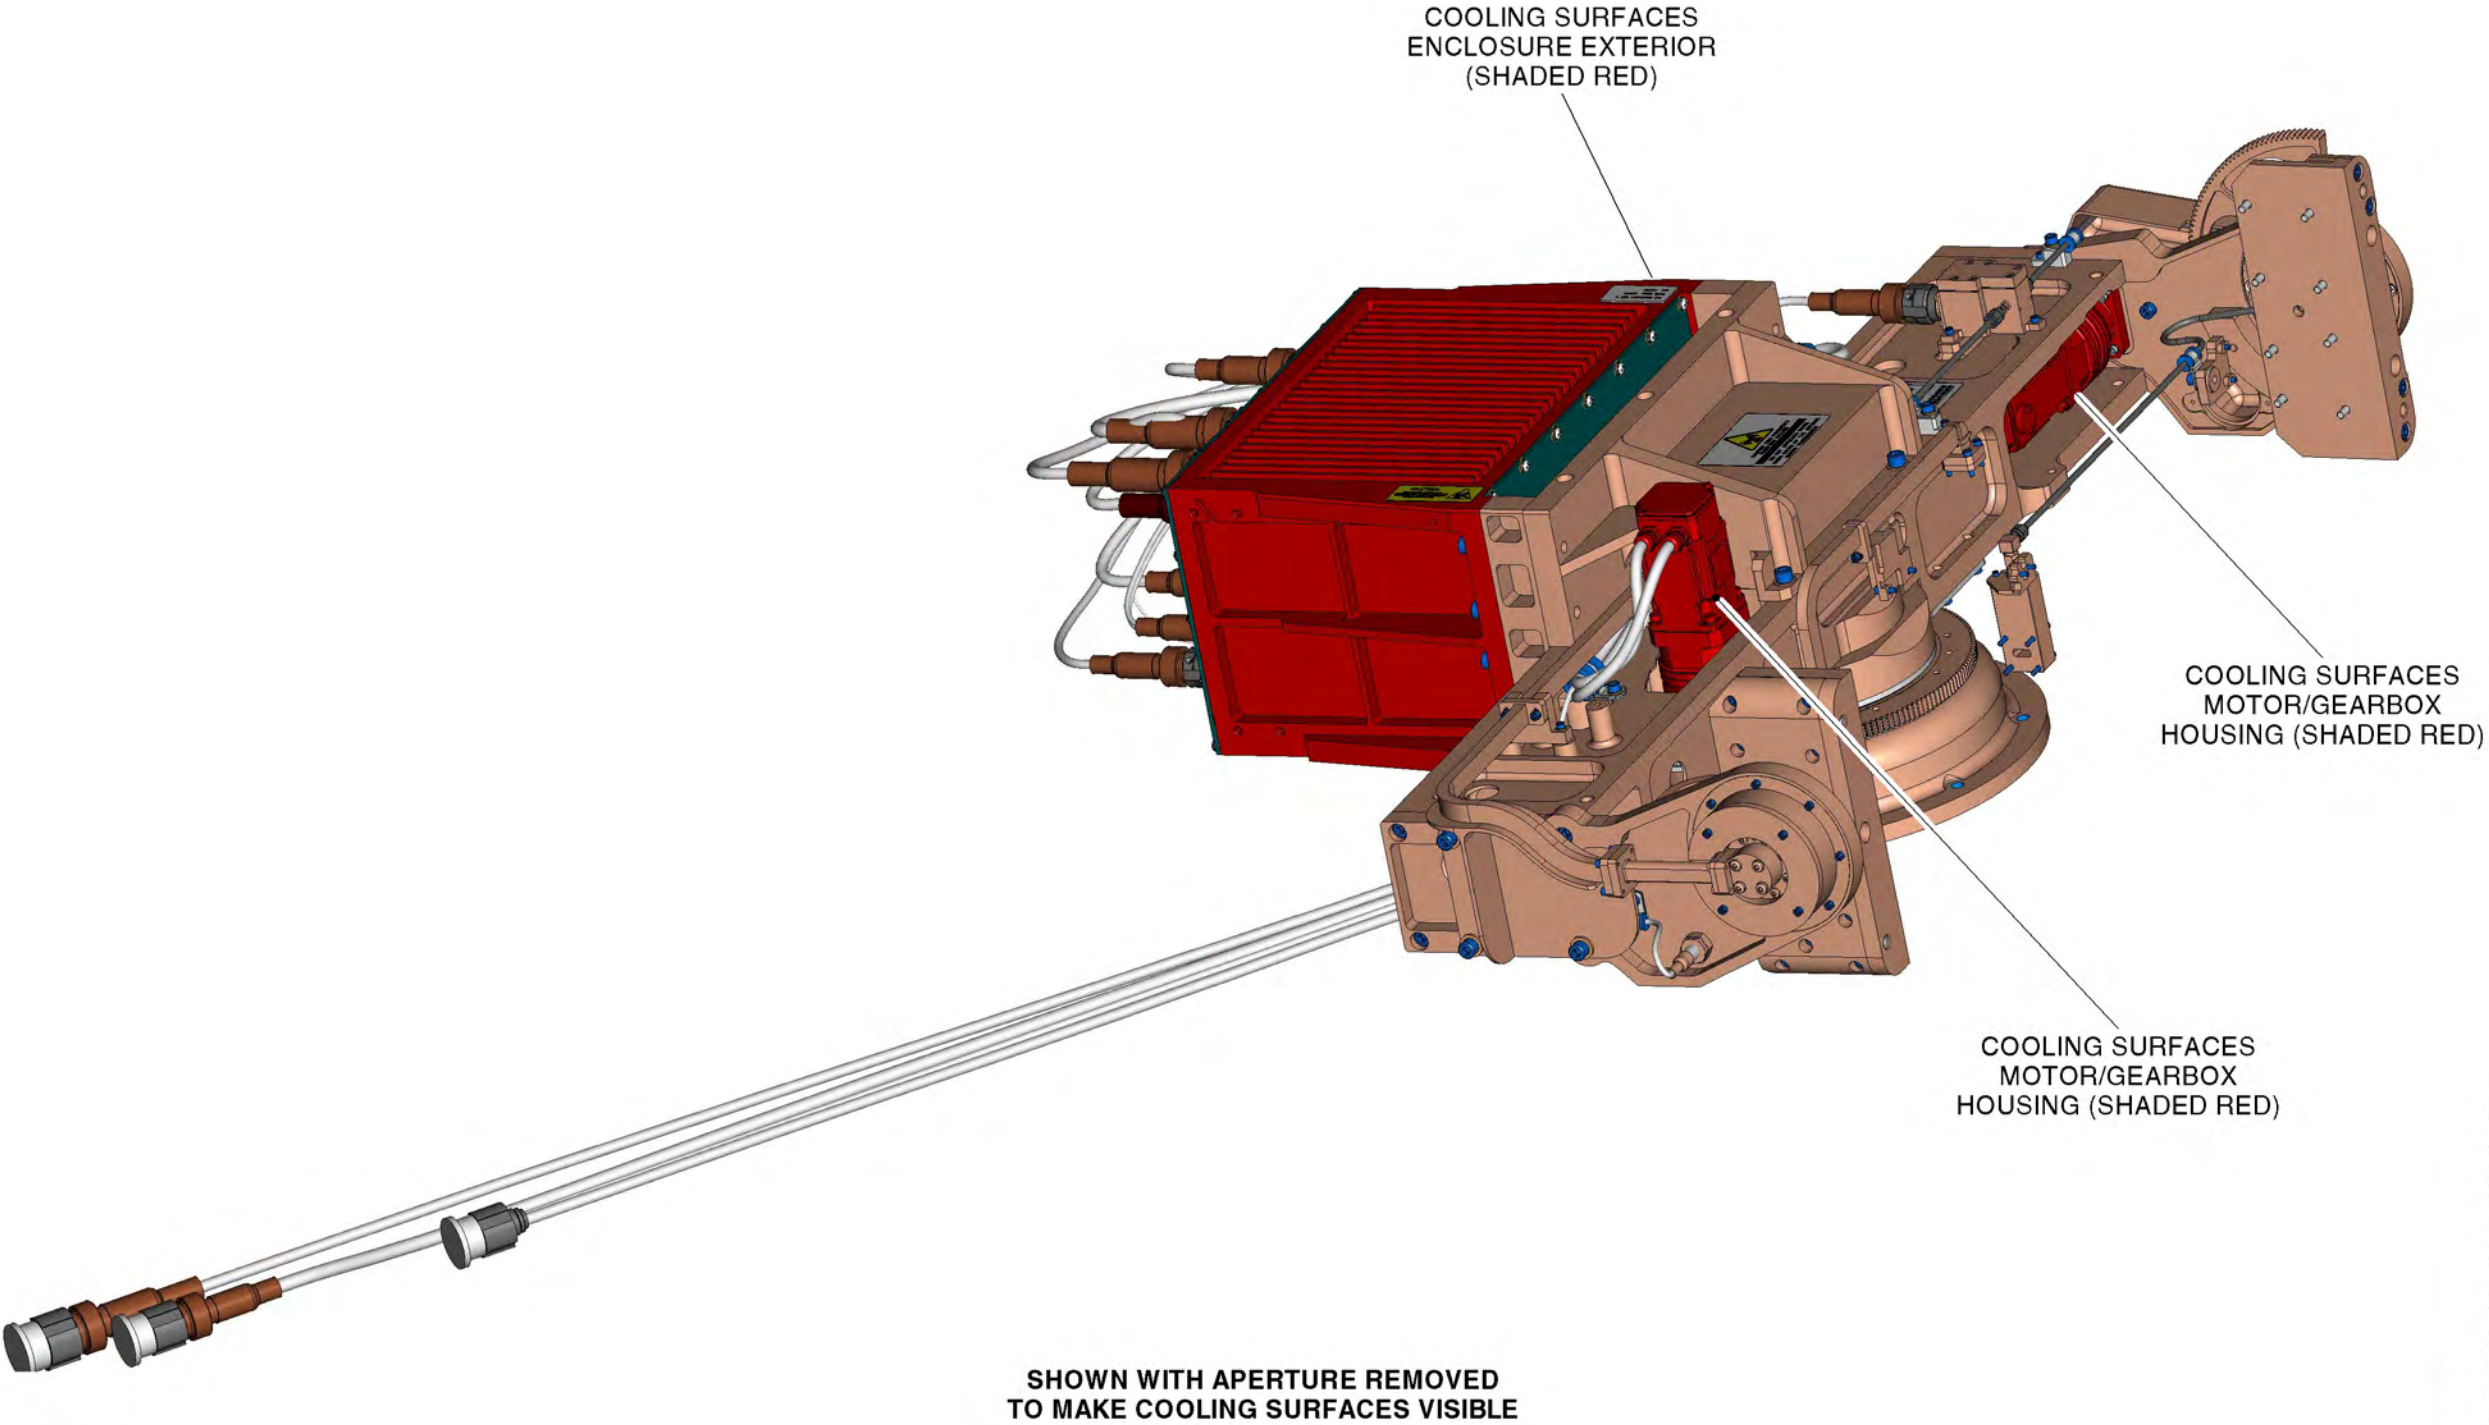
FMA Outline and Installation Drawing (Sheet 11 of 12)
